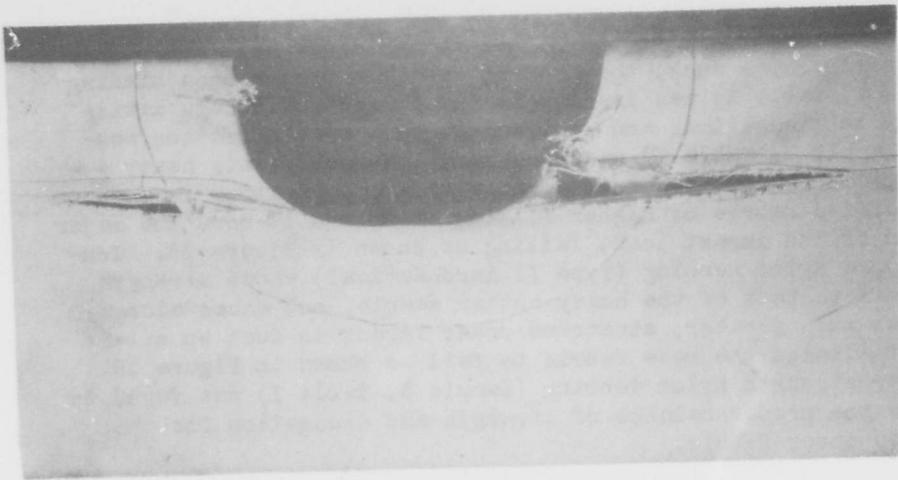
LABORATORY IMPACT FAILURE (SPECIFICATION CENTER CUTOUT AND FABRIC)
